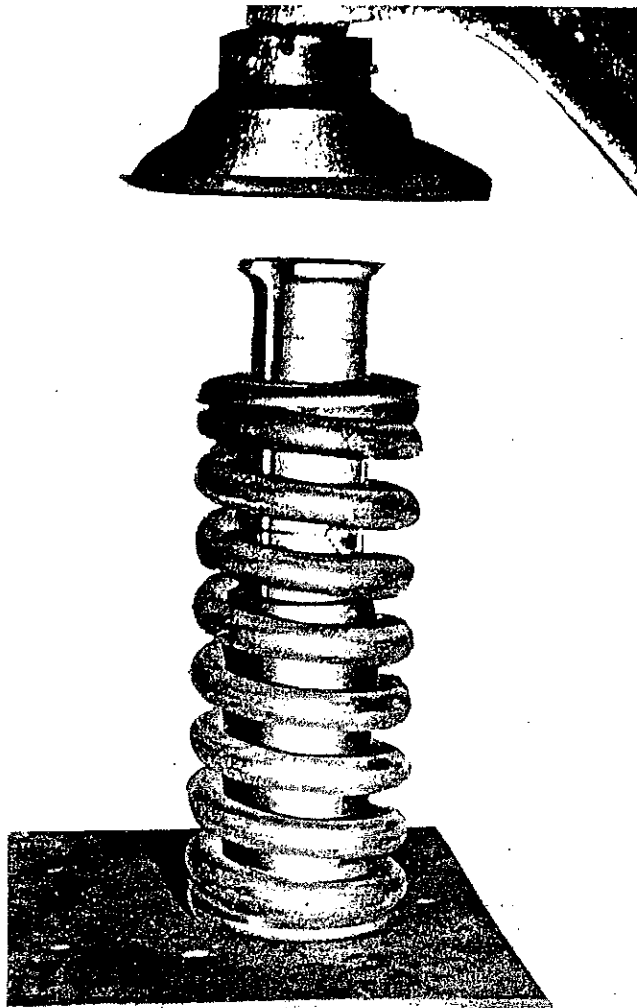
ALL PARTS IN POSITION FOR FINAL ASSEMBLY
